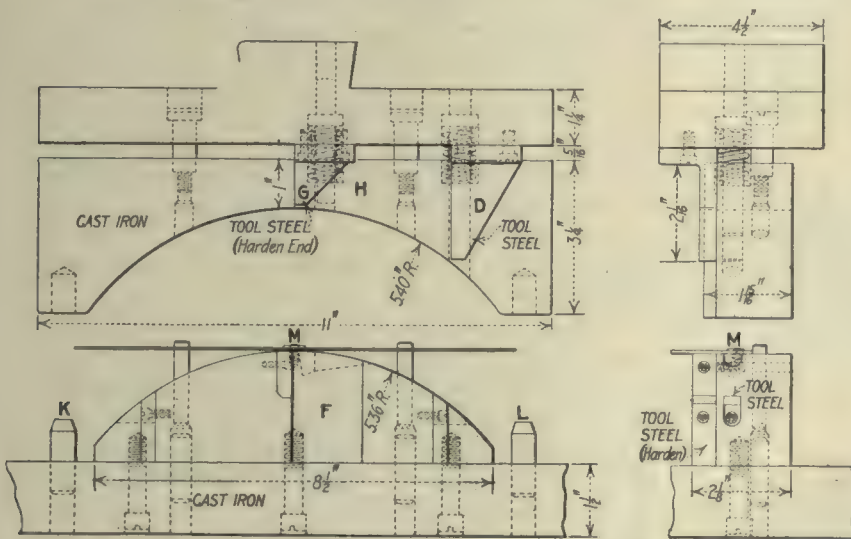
FORMING DIE FOR UNIVERSAL BAR
